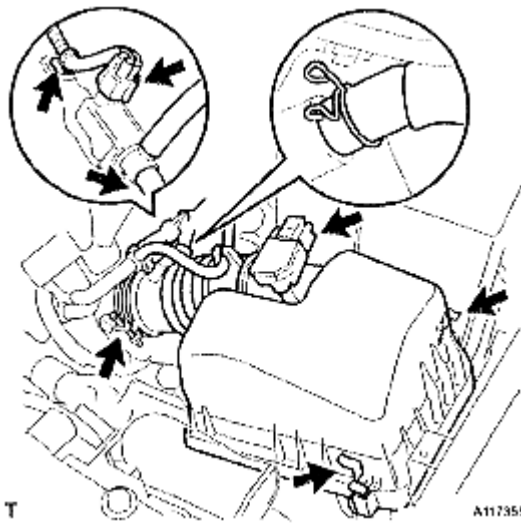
Locating Intake Air Flow Meter Connector And Wire Harness Clamp
